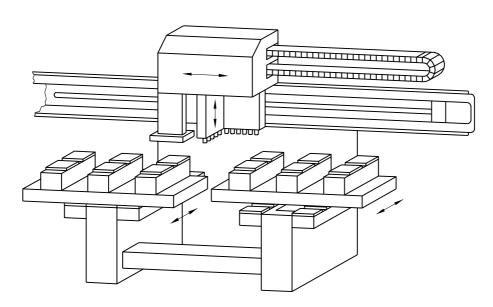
Example 7 of a C frame boring machine (moving tables, fixed portal, moving heads)
